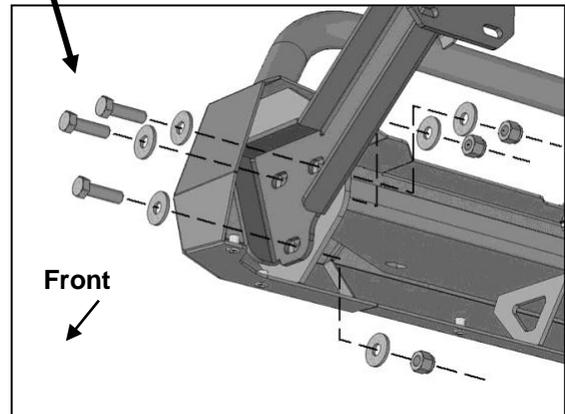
Attach Skid Plate to the bottom of the center splash guard
